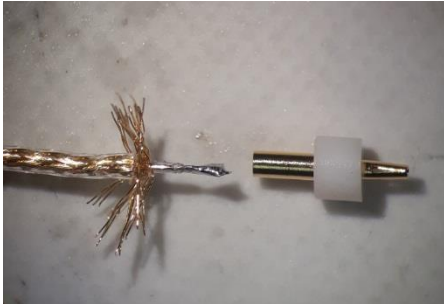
Insert the tinned section of the inner into the hole in the back of the contact assembly. It may be necessary to heat the metal and the tinned inner in order to melt the solder in order to slide the tinned section into the narrow hole. Once the section is inserted a soldering iron should be used to heat the
